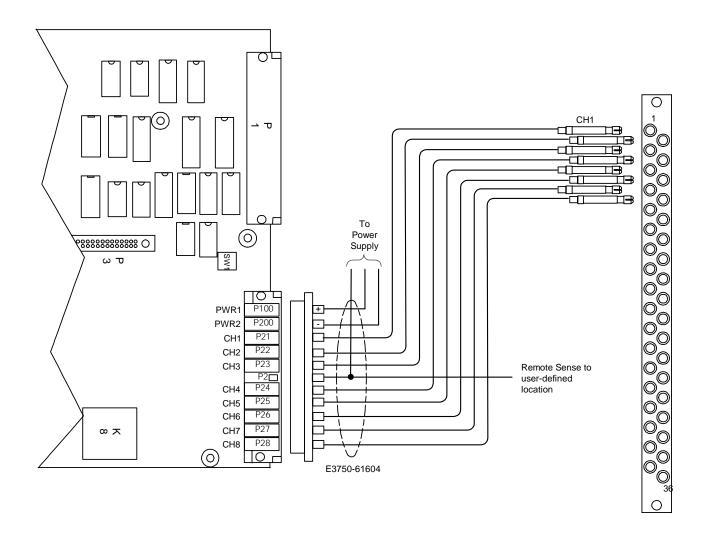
Agilent E6178B 8-Ch. Heavy Duty Load Card Cabling to High Power ICA Fixture Block
